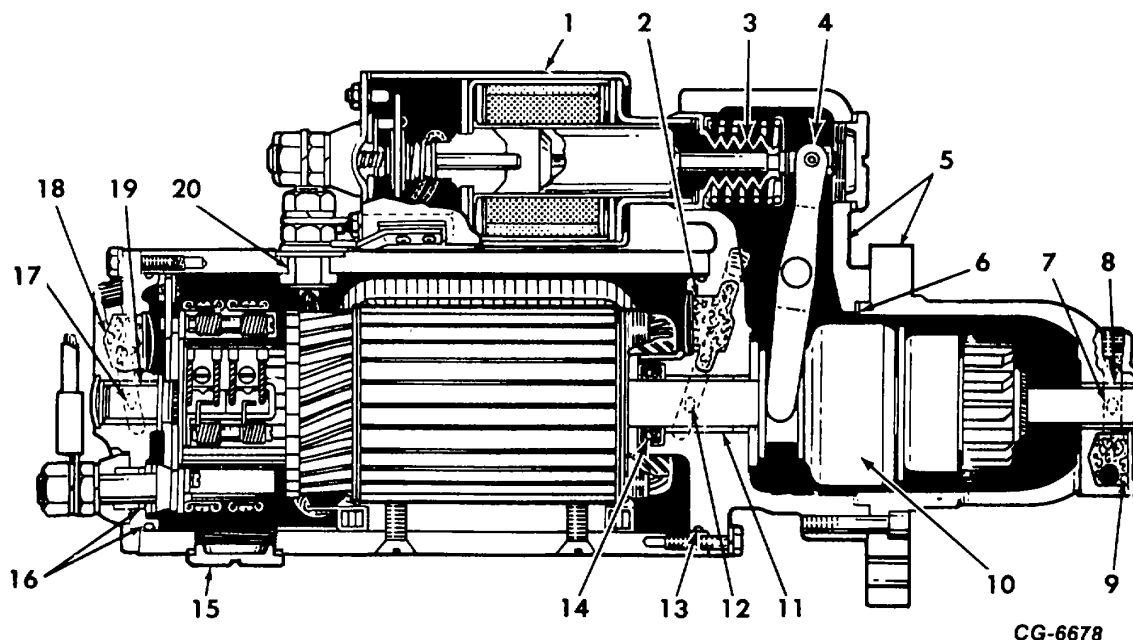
Sectional View of Starting Motor with DR-250 Heavy Duty Drive
